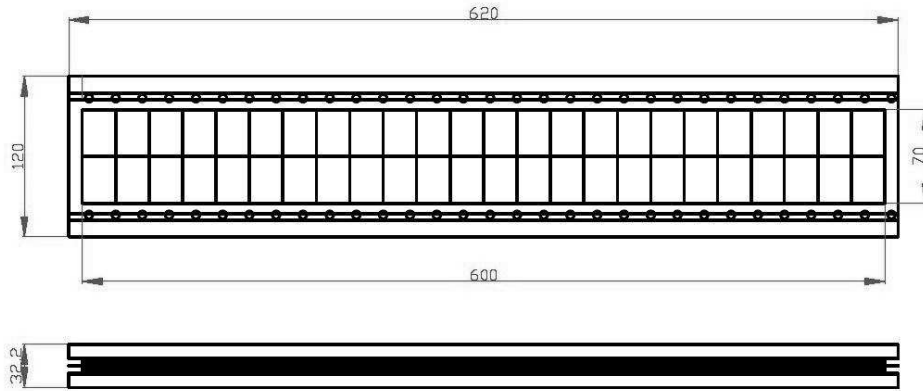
Arrangement of pads on the readout plane and main dimensions of the MRPC element.
